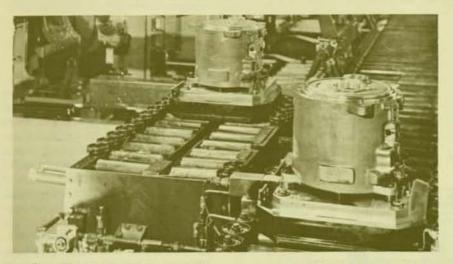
Part and pallet, moving along conveyor, are checked by photoelectric reader at each machine's banking and loading station. When machine and pallet codes agree, pallet is shifted onto machine's holding conveyor, unless it is filled.
